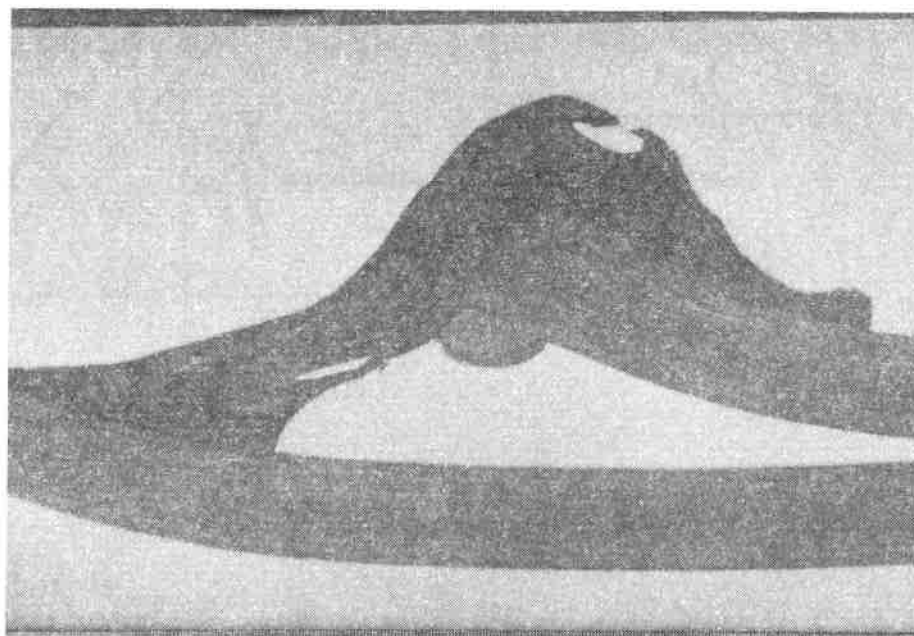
Cross section of extruded fillet seam. (x 5)
